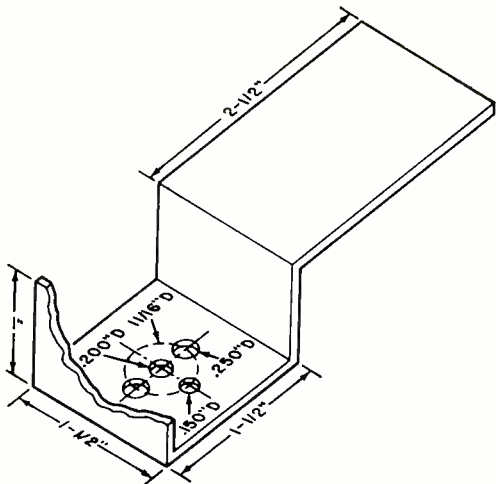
Drilling and bending details for the heat sinks used at Q3. Cut from aluminum sheet stock.
